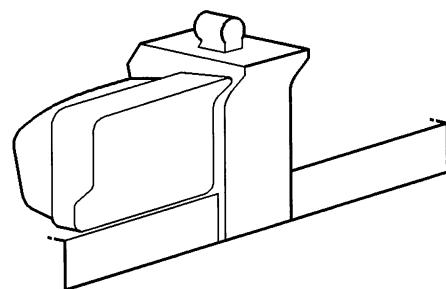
CIRCUIT BREAKERS ASSEMBLY
